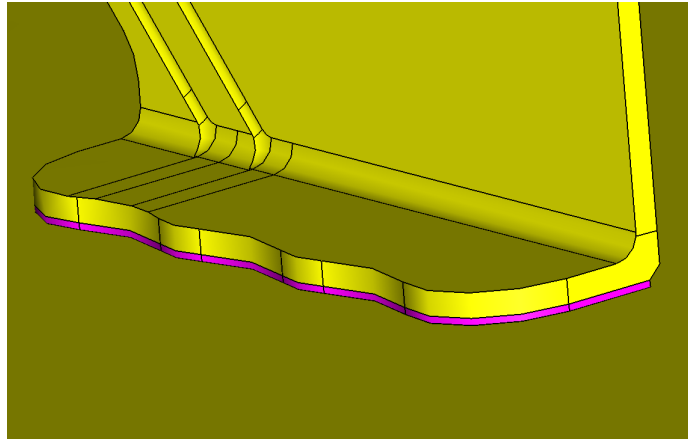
An example weld (in pink) between a wing skin and a bracket on a BAE Systems model.
